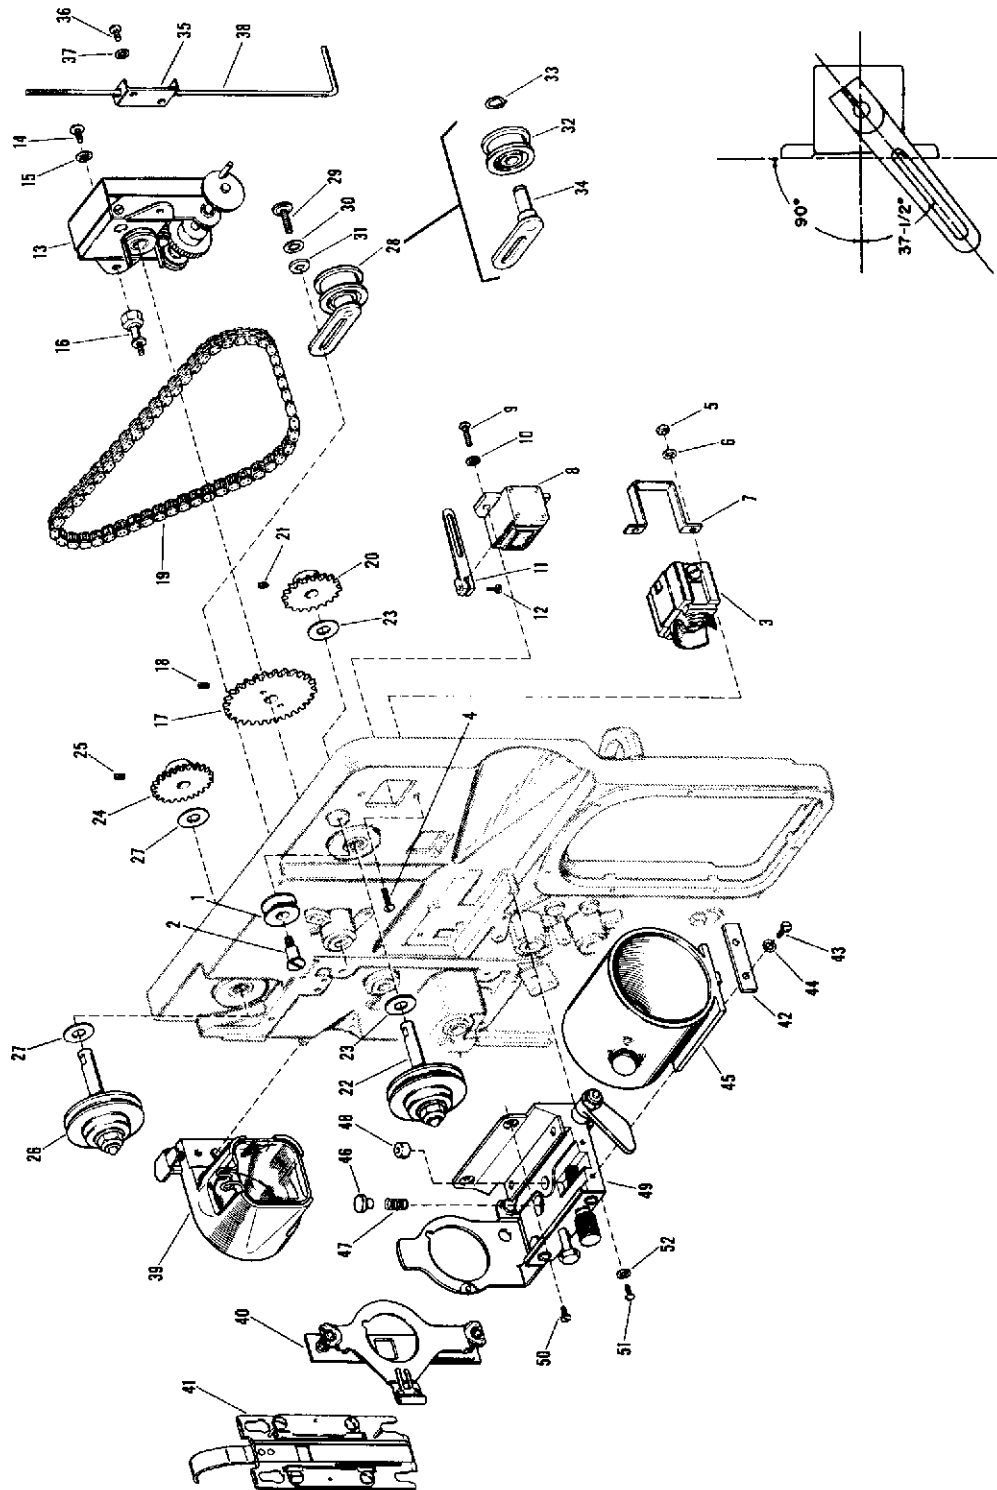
Removing Pulleys, Film Counter, Aperture Plate and Pressure Plate
